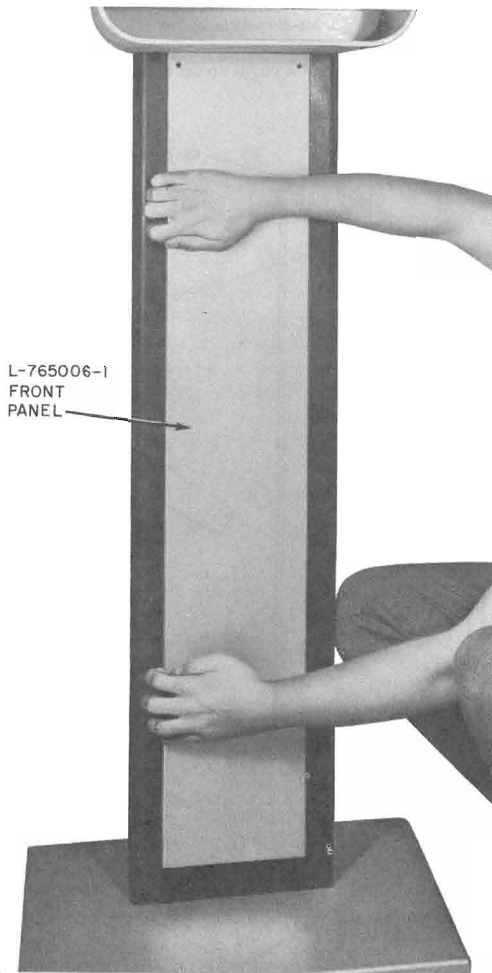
Installing or Removing the Front Panel on Post Assembly
